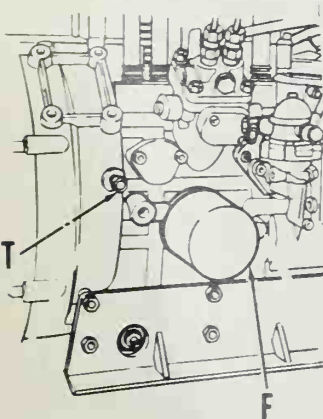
View showing location of external oil filter (F). Unscrew plug (T) and connect oil pressure gage to measure oil pressure.
